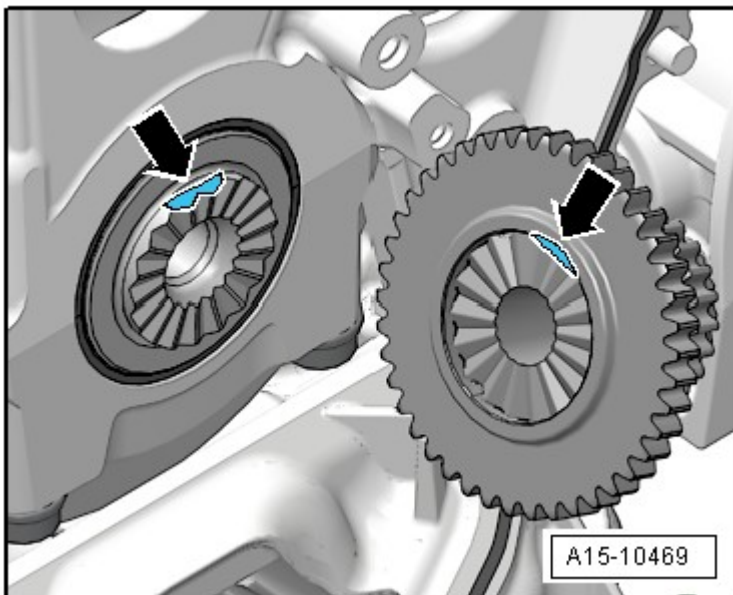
Identifying Chain Sprocket Crankshaft, Installation Position
